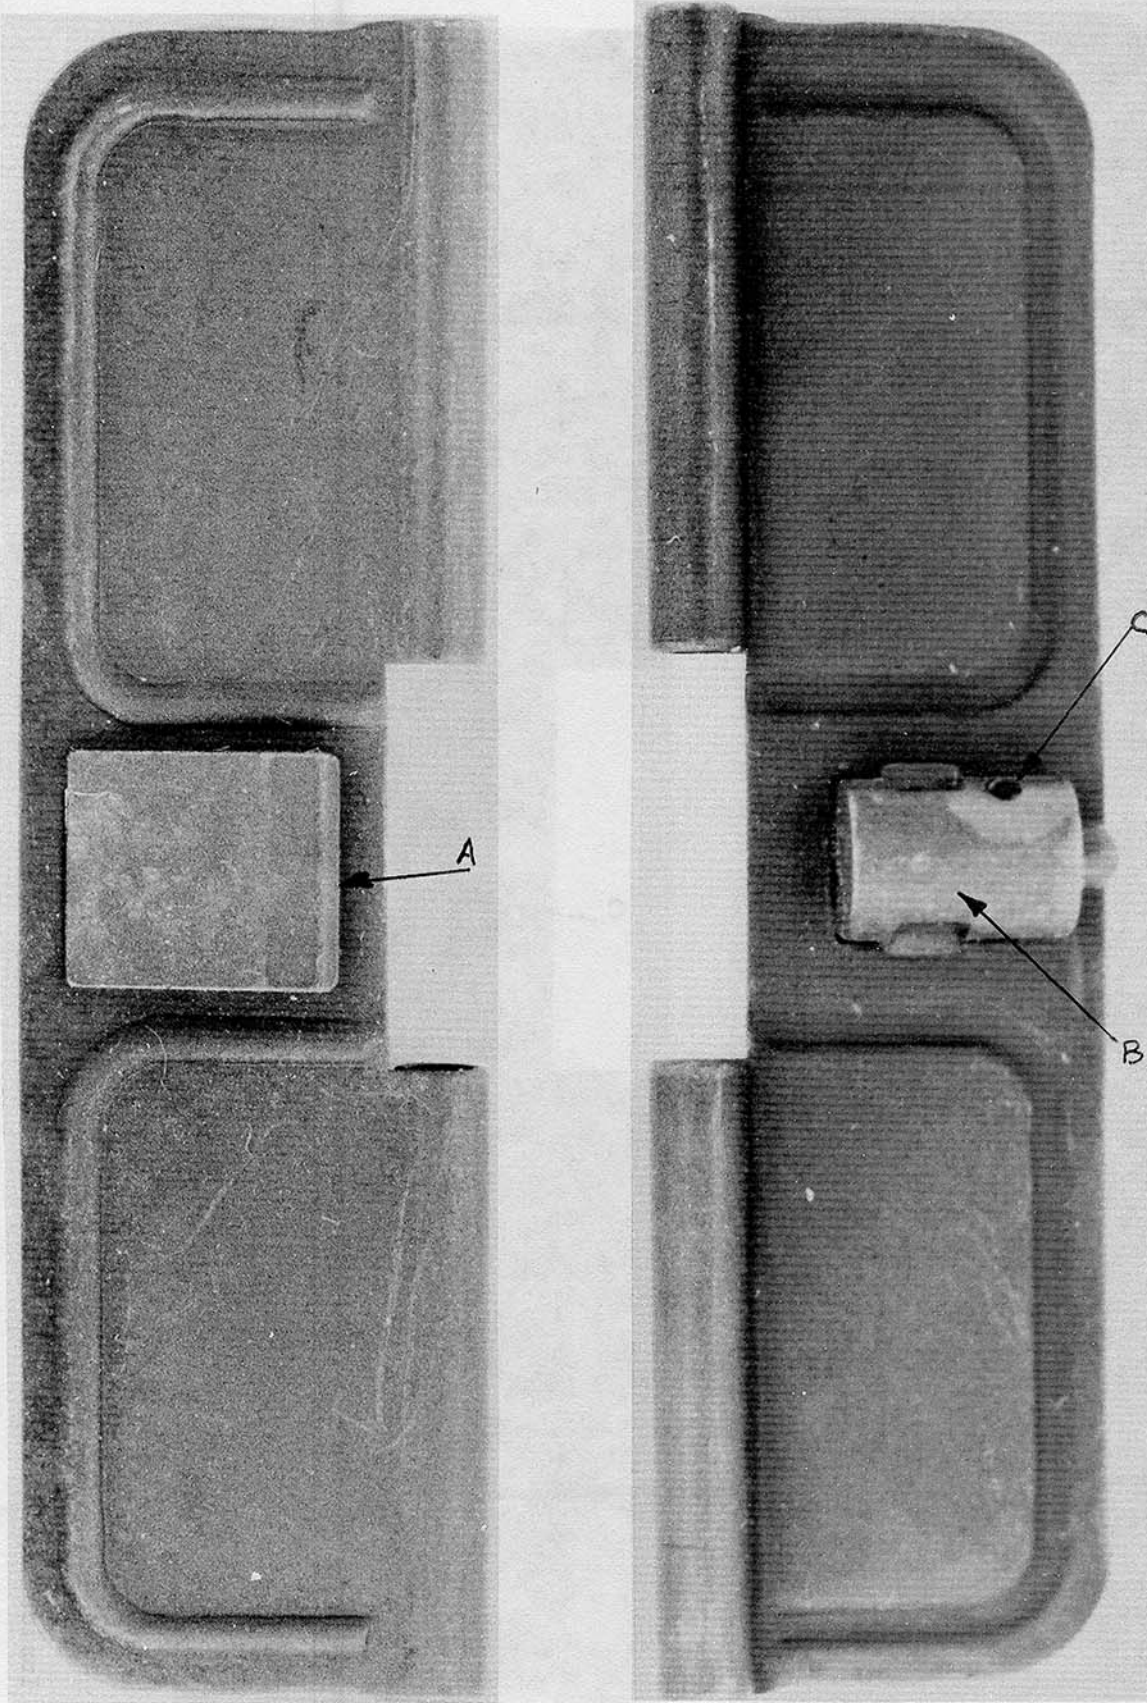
Ejection port cover from US supply (manufacture date 2/81). Outside view at top. Inside view at bottom.
